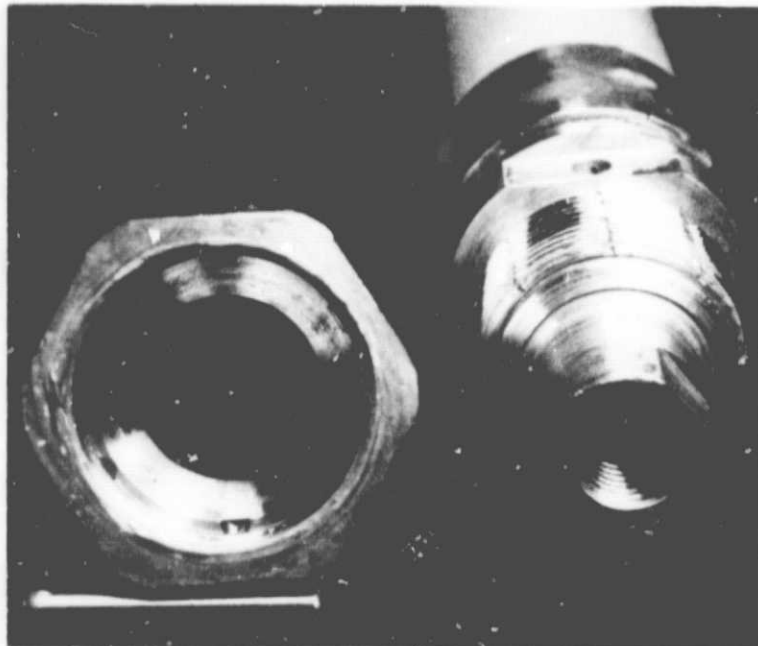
Conical Load Surfaces After the Second Fatigue Test
